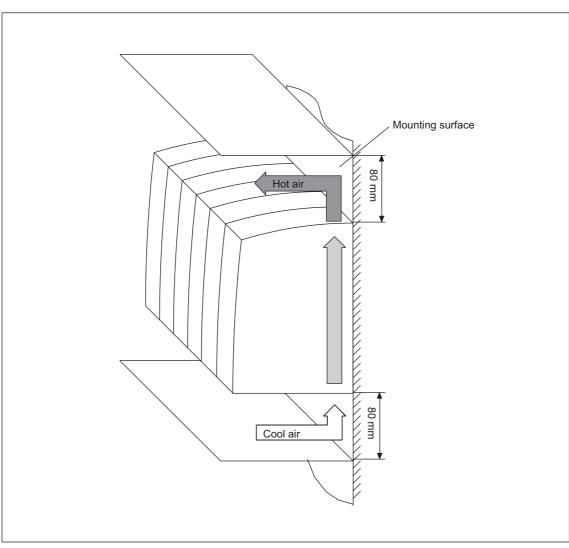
Clearances for booksize drive line-up with internal air cooling
